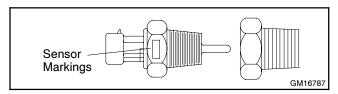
Coolant Temperature Sensor and Reducer Bushing (if equipped), Typical
